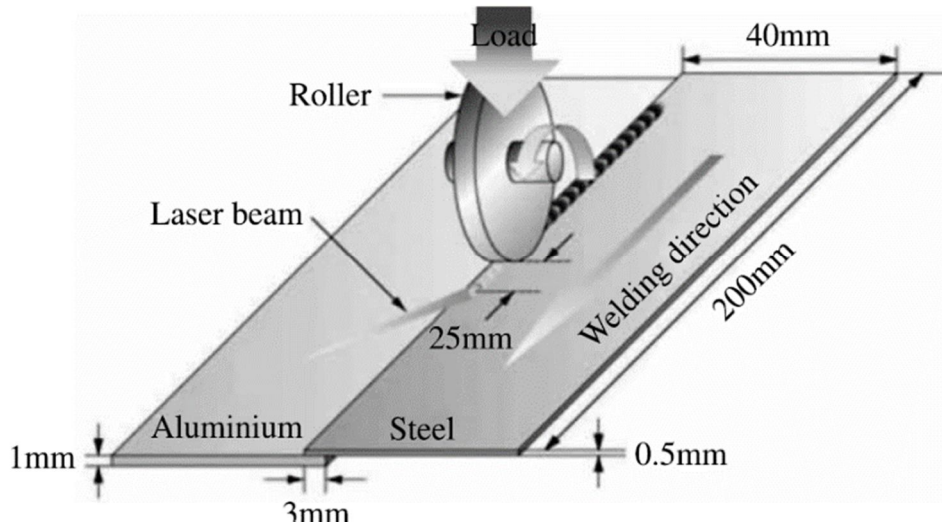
Schematic of laser roll welding of aluminium alloy and steel [19].
